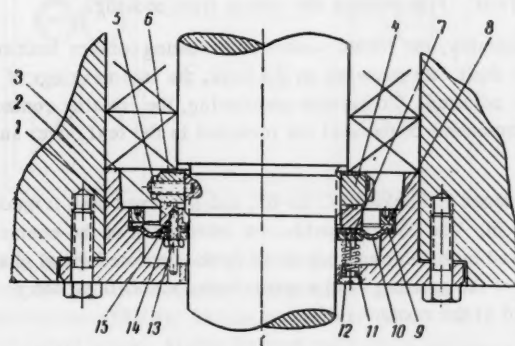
External open-sided contact seal. 1) Seal cover; 2) body of the reduction gear; 3) and 4) fixed and moving contact bushes; 5) binding bolts; 6) folded washer; 7) positioning pin; 8) clamping collar; 9) washer; 10) diaphragm; 11) springs; 12) plug screws; 13) locators; 14) sprung collar; 15) thermally insulating gaskets.
